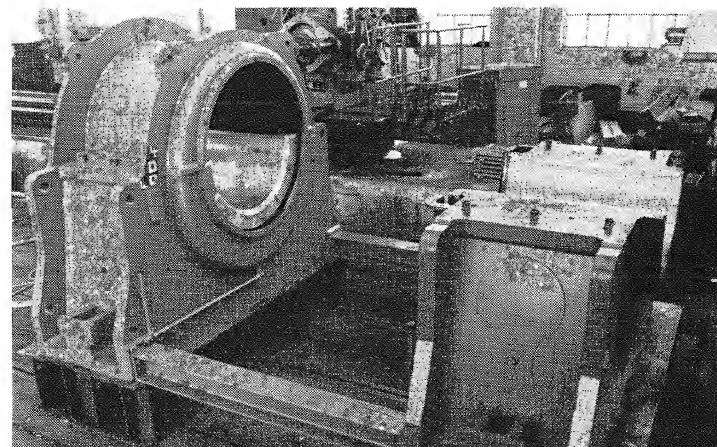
Kiln roller mounting (KHD Humboldt Wedag AG, Cologne)
